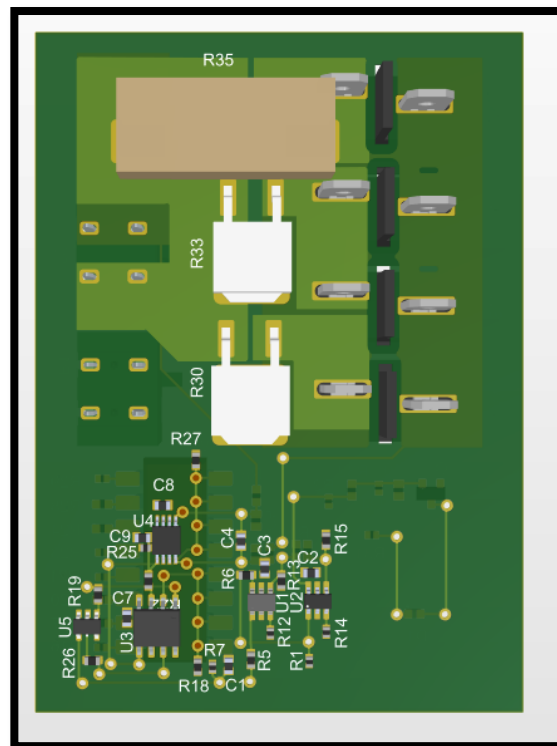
The 3D View from the Bottom Side of the Initial PCB
